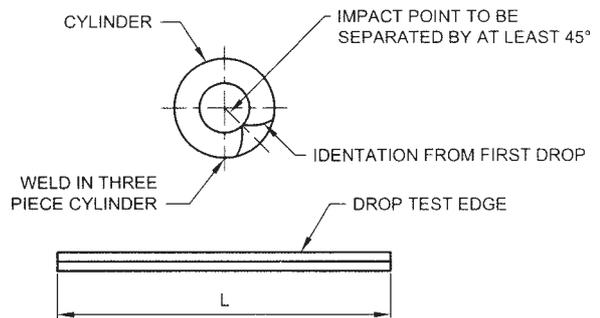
IMPACT TEST WITH AXIS PERPENDICULAR TO EDGE, L
